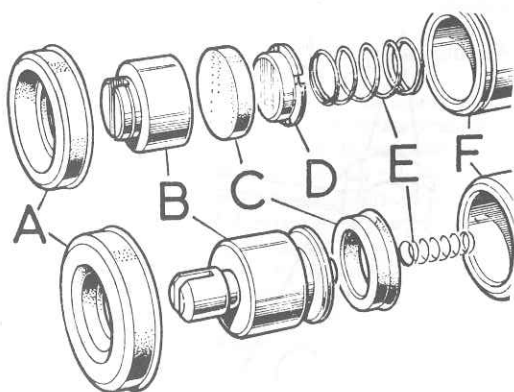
The two types of piston and seals fitted in the front wheel cylinders of the LWB models
